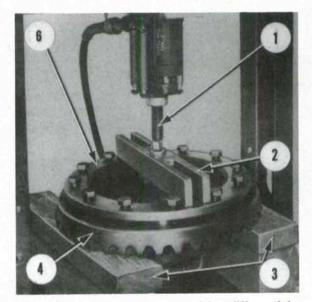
Installing bevel ring gear (4) to differential case (6). Gear is aligned with case by installing retaining cap screws, then case is pressed into gear.
